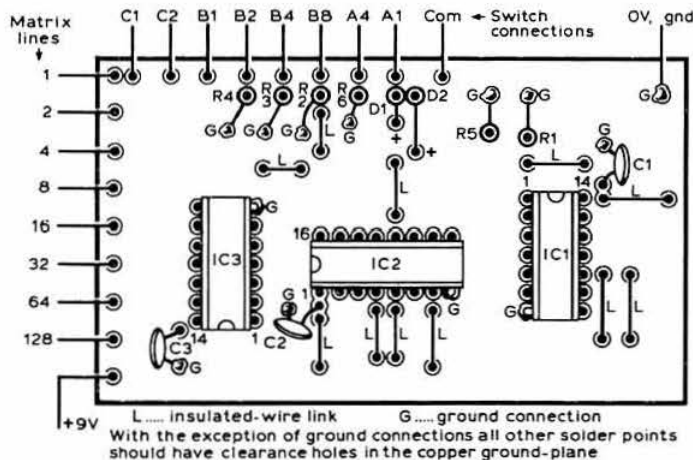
Printed circuit board, track side (top side plain copper with clearance holes)
